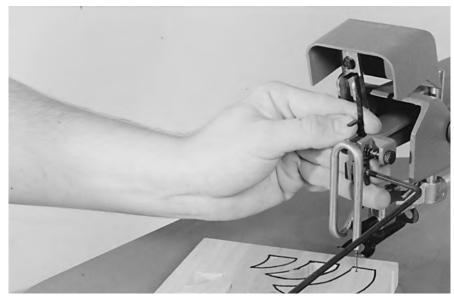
For piercing cuts, drill a starting hole close to a corner and thread the blade through it.
